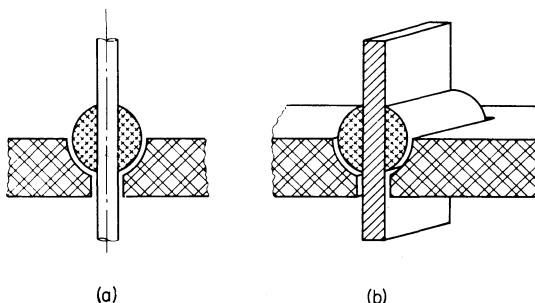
Ceramic-glass-metal seals; (a) rod seal; (b) plate seal
